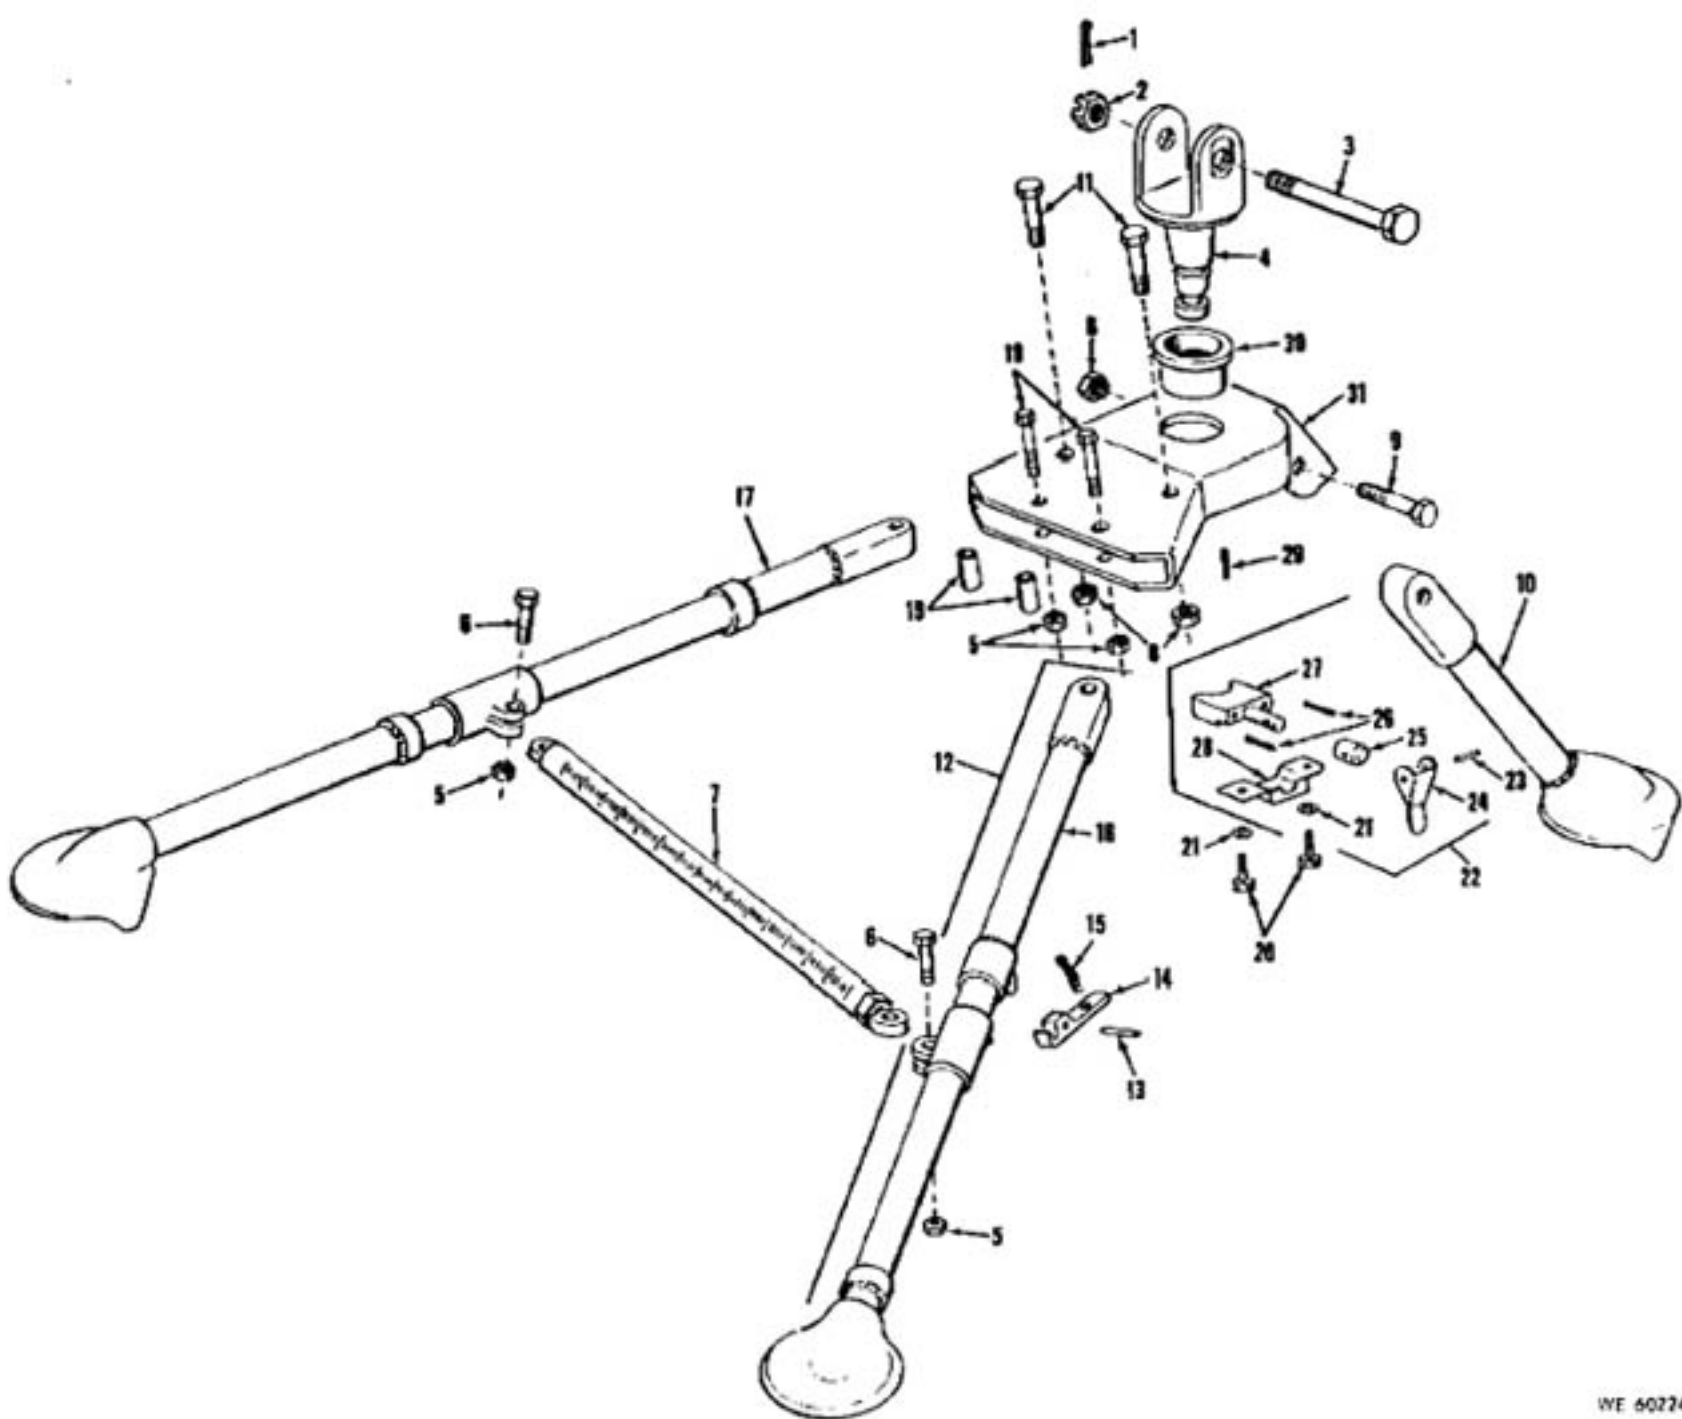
Retracting bar group for Caliber .30 Machine Gun, M37 only—exploded view.
